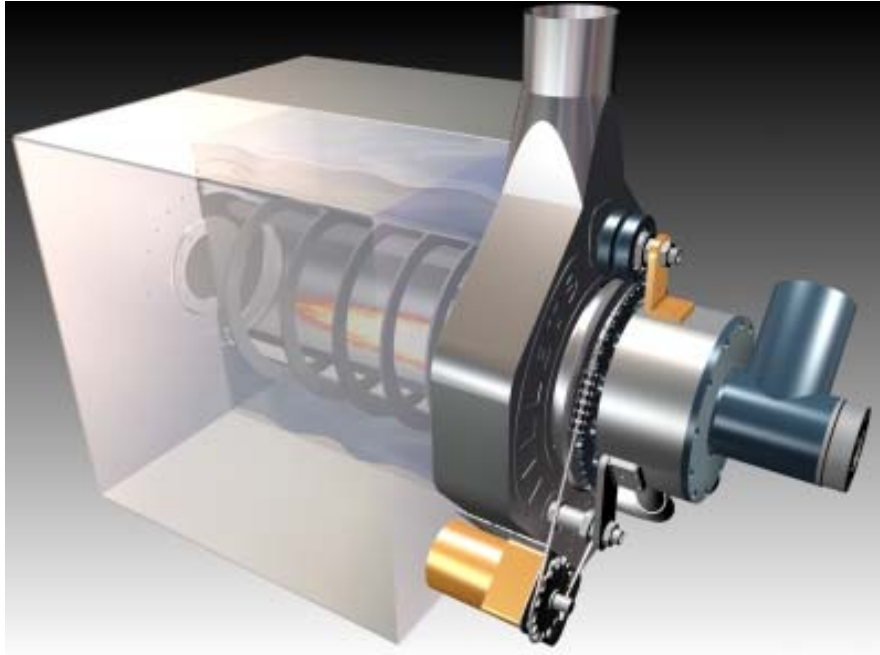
Cut away view of the Pellet Integral mounted into a prototype boiler.
